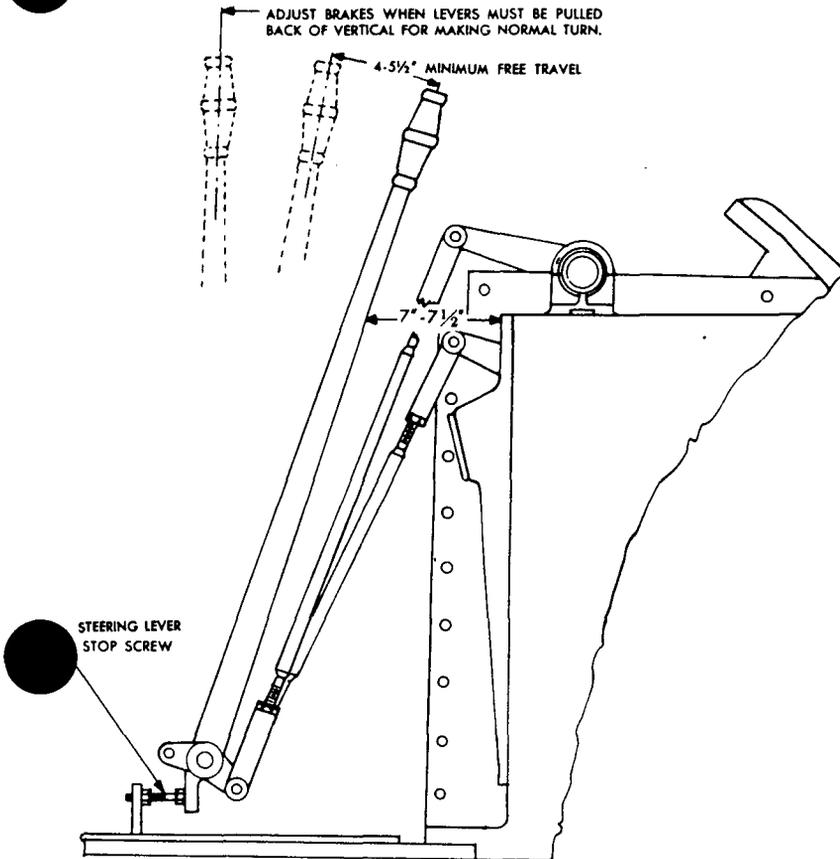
Single-anchor Brake Steering Lever and Brake Actuating Shaft Positions
